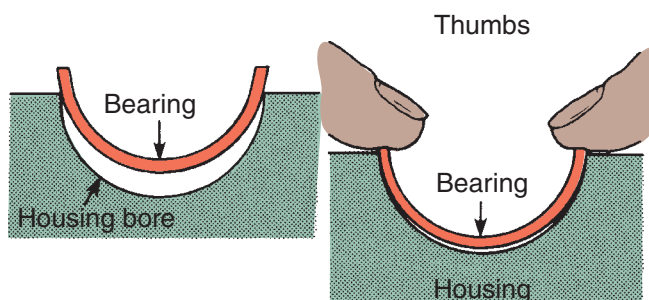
Spread requires a bearing to be lightly snapped into place.
